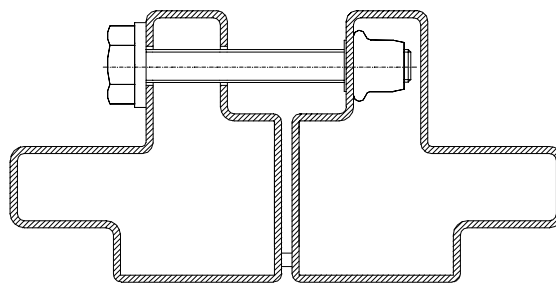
Chambers connection (rotary heat exchangers and horizontal arrangement)
